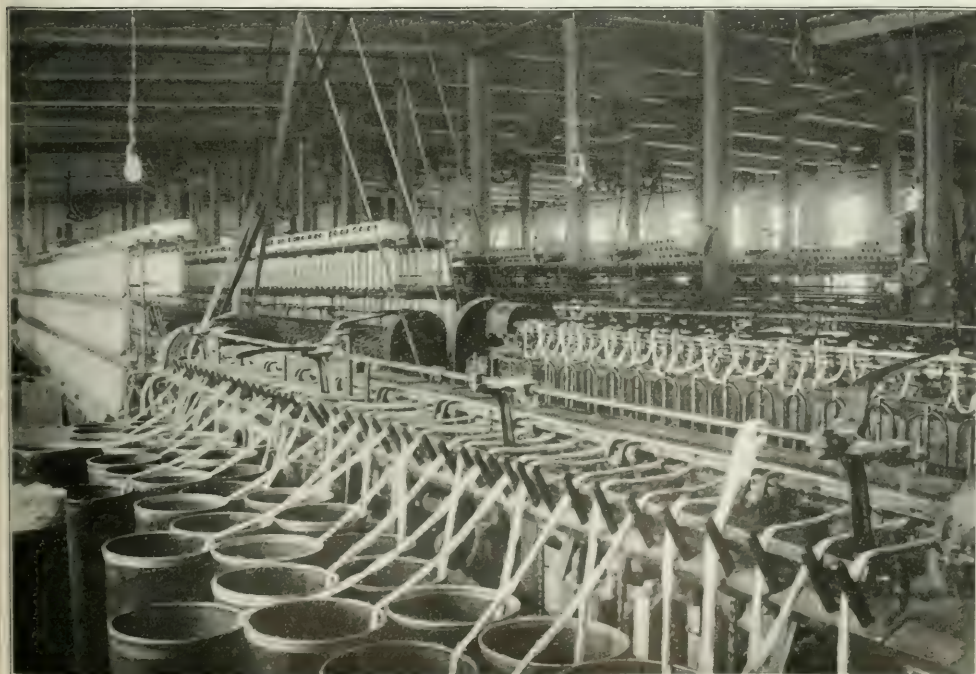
MOTOR DRIVE IN COTTON MILL, WEST, TEX.
